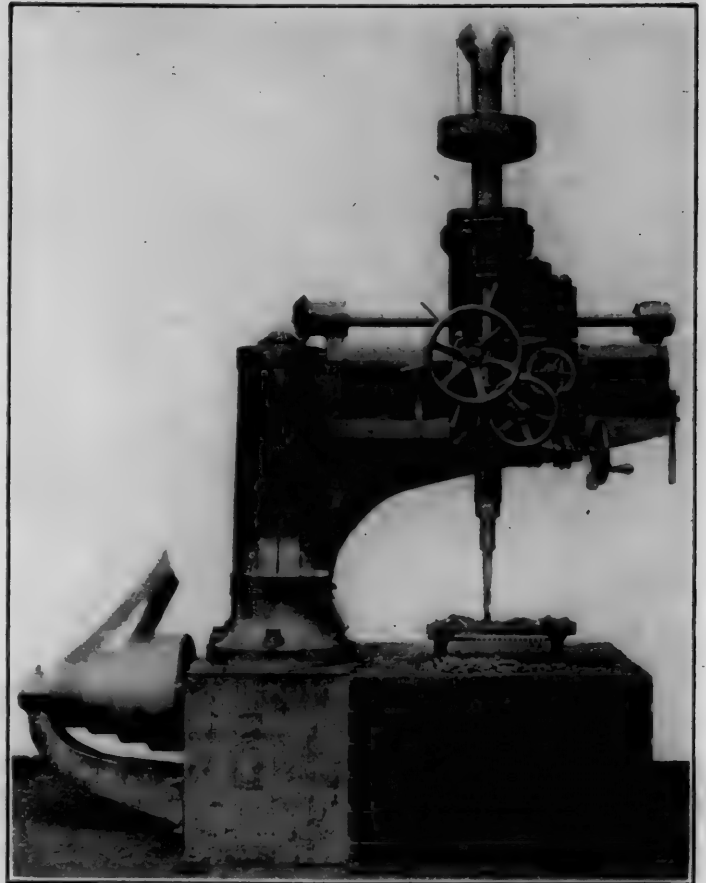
HIGH SPEED RADIAL DRILLING MACHINE.
